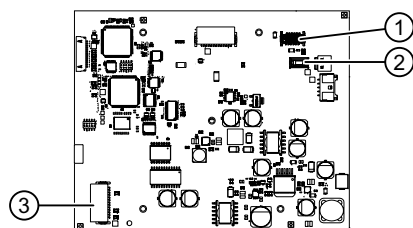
Analyzer module printed circuit board, interfaces ULTRAMAT 7
